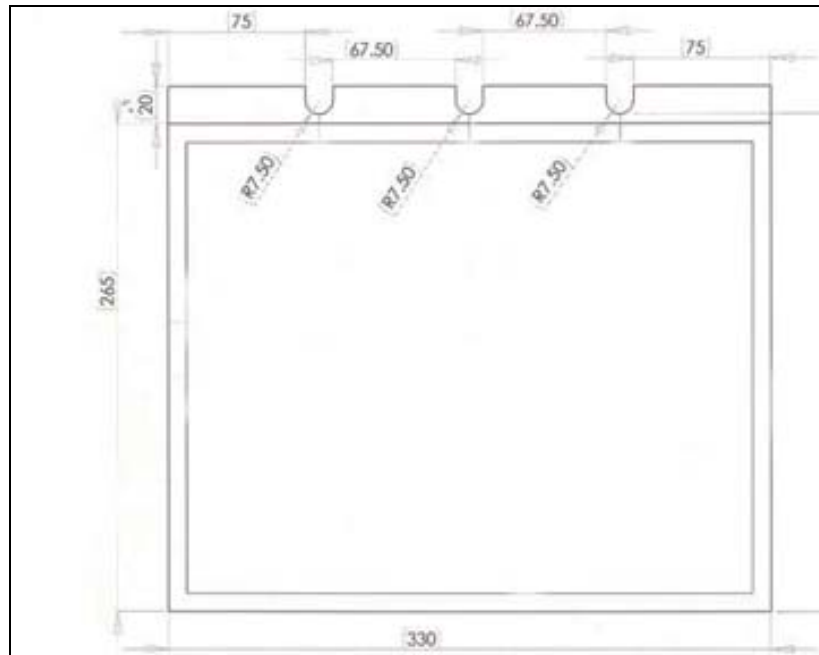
SolidWorks® drawing of a burst tray insert: top view.
